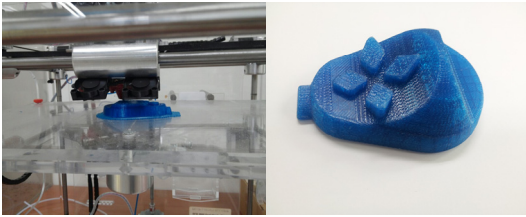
Photos of 3D printer working and finished part obtained by the 3D printing system
